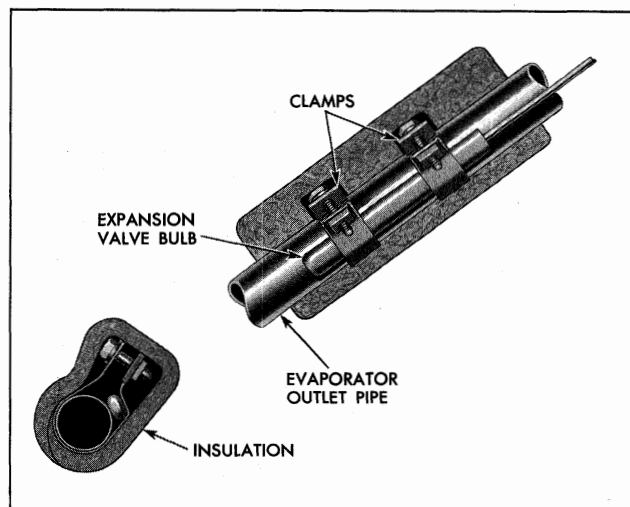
Expansion Valve Bulb at Evaporator Outlet Pipe
